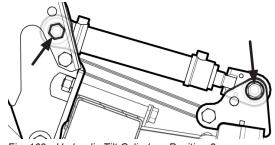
Hydraulic Tilt Cylinder - Position 3
